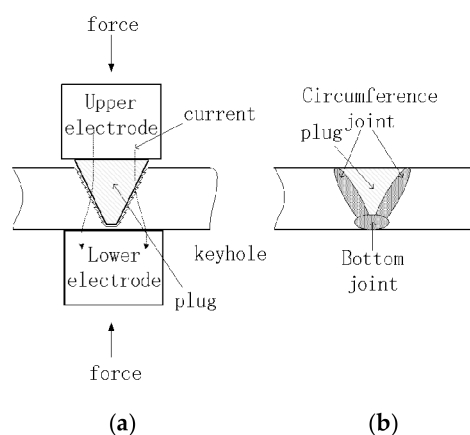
The illustration of the new refill technique using resistance spot welding (RSW). (a) unfilled; (b) filled.
